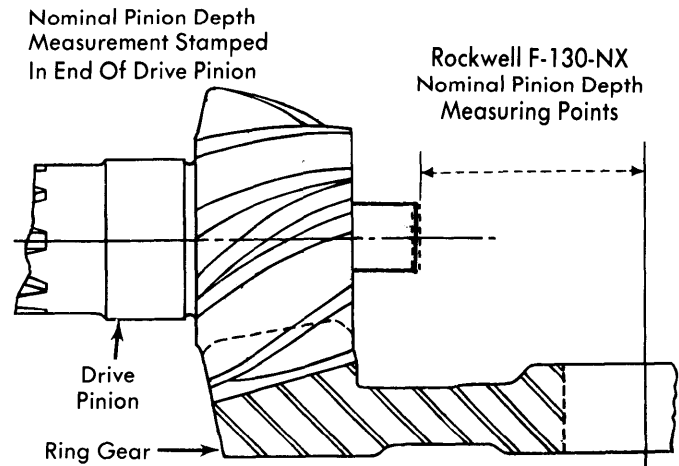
Nominal Pinion Depth Measuring Points For Rockwell F-130-NX Drive Axle
